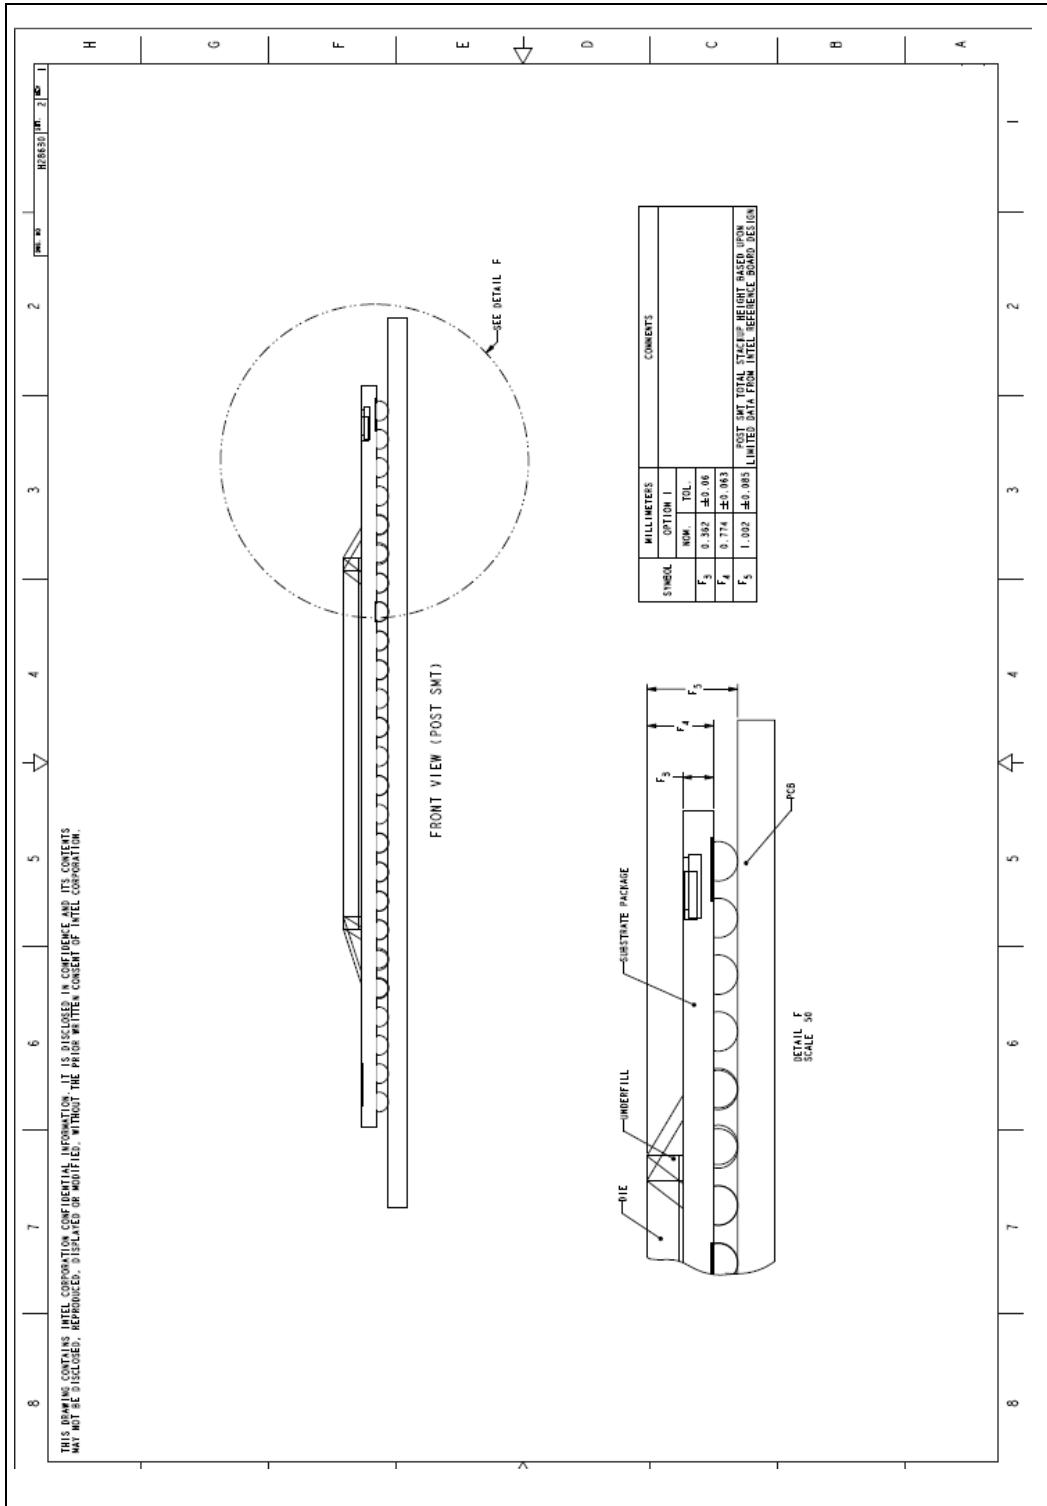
Package Mechanical Drawing for MSP-T4 (Part 1)
